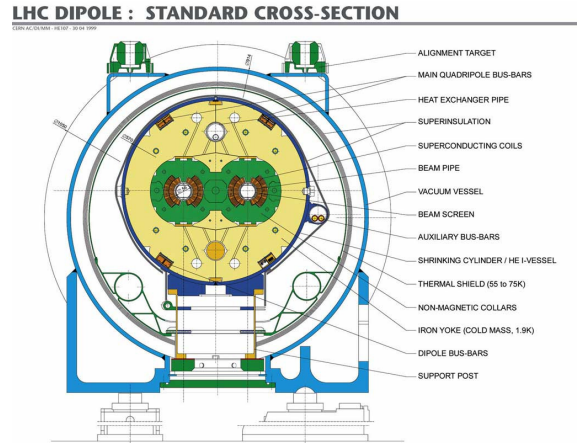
Sectional view of a dipole magnet, showing the two separate vacuum chambers.
